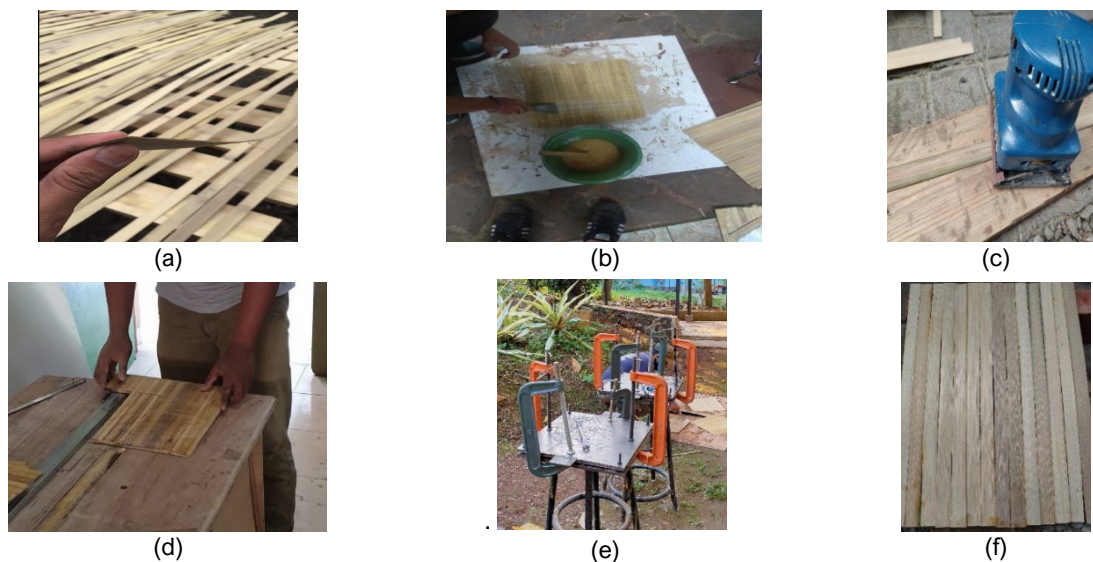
The process of making laminated bamboo specimens: (a) formation of laminated bamboo slats, (b) Apus bamboo gluing process, (c) brushing resin onto apus bamboo to ensure adhesion, (d) forming a laminated board using three, five, or seven layers of bamboo, (e) laminate board clamping, (f) apus bamboo laminated board.
